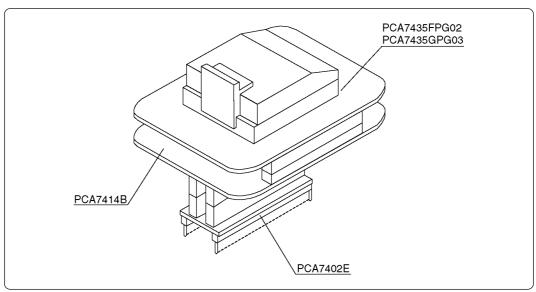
External view of the and its constituent parts (PCA7435FPG02/PCA7435GPG03)
